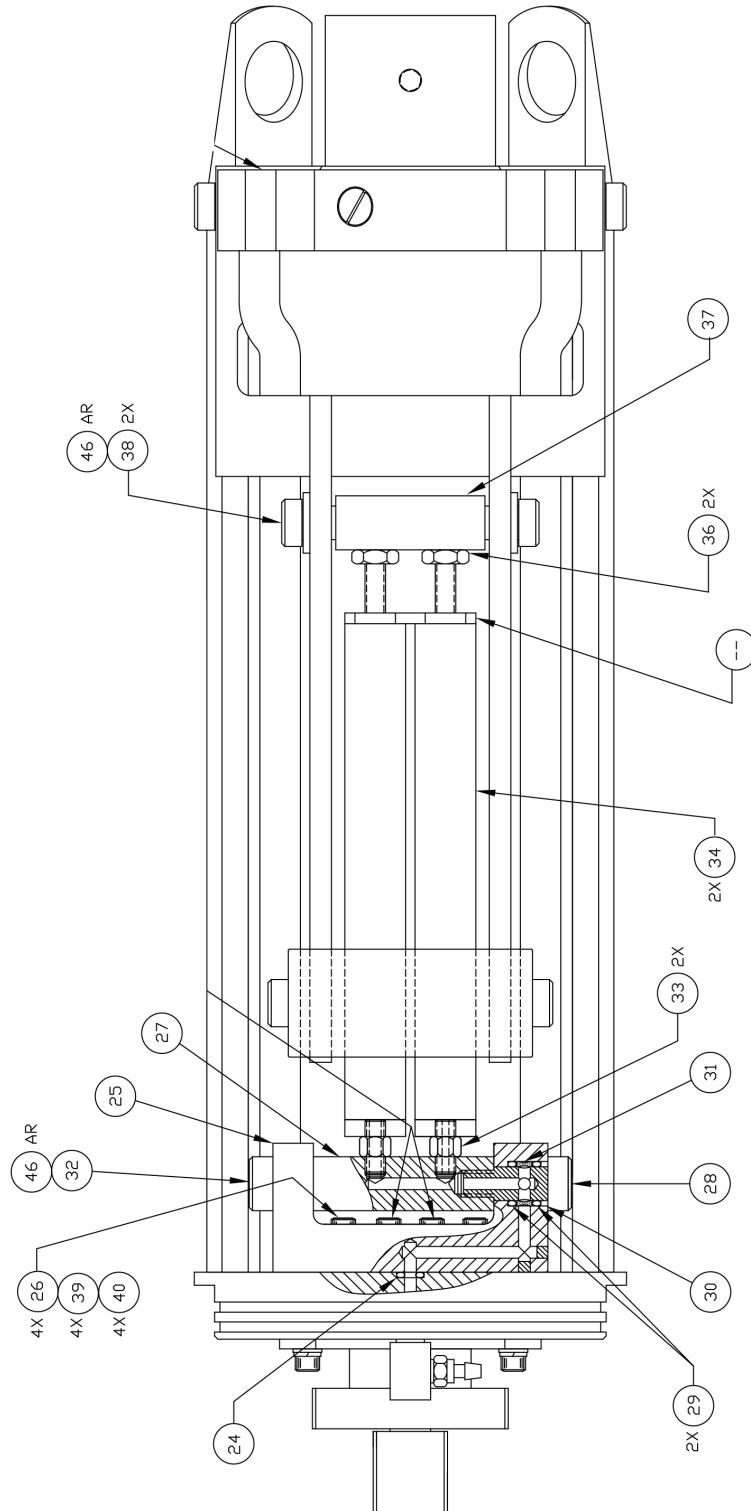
A. BALLSCREW CYLINDER ASSEMBLY KC310
